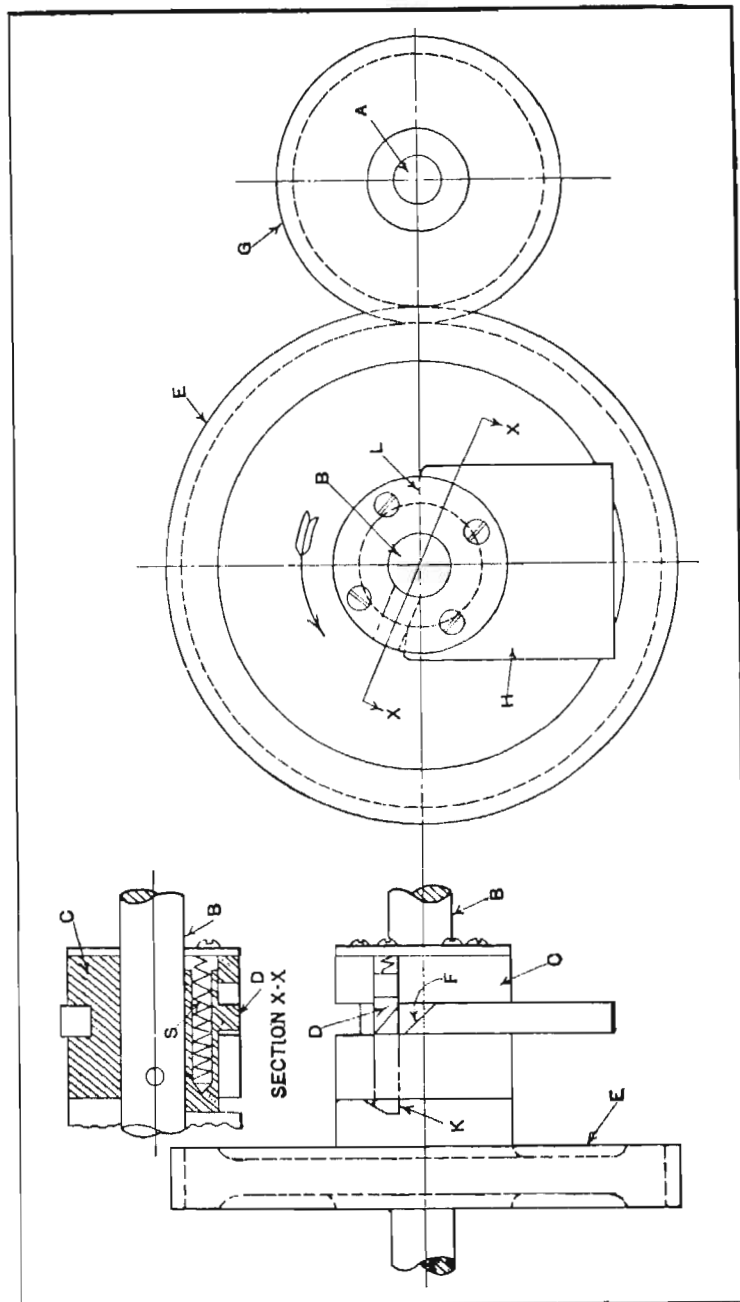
Intermittent Gear Drive Actuated by Cam-operated Clutch Dog
